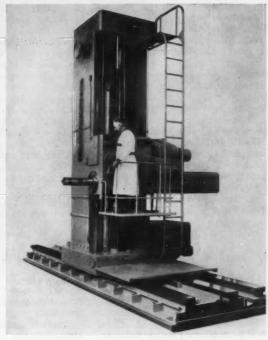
Giddings & Lewis floor type, precision horizontal boring, drilling, and milling machina equipped with a 6-inch diameter spindle
